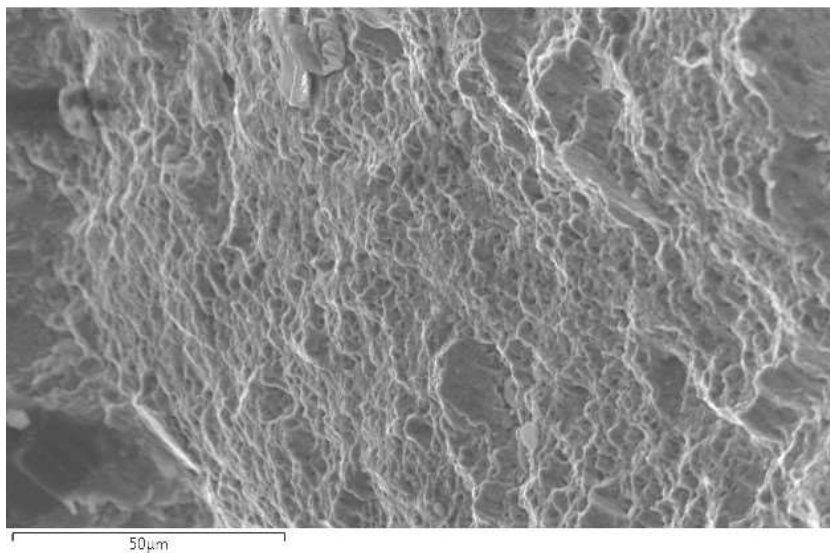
Dimples indicating ductile fracture in the CrMoV clad layer
